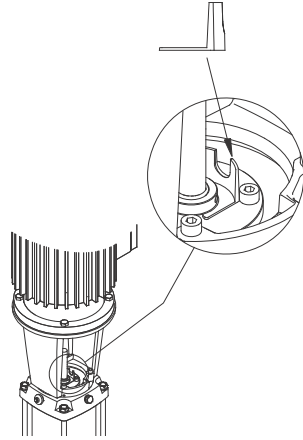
Coupling adjustment CR, CRN 32, 45, 64, 90, 120, and 150
